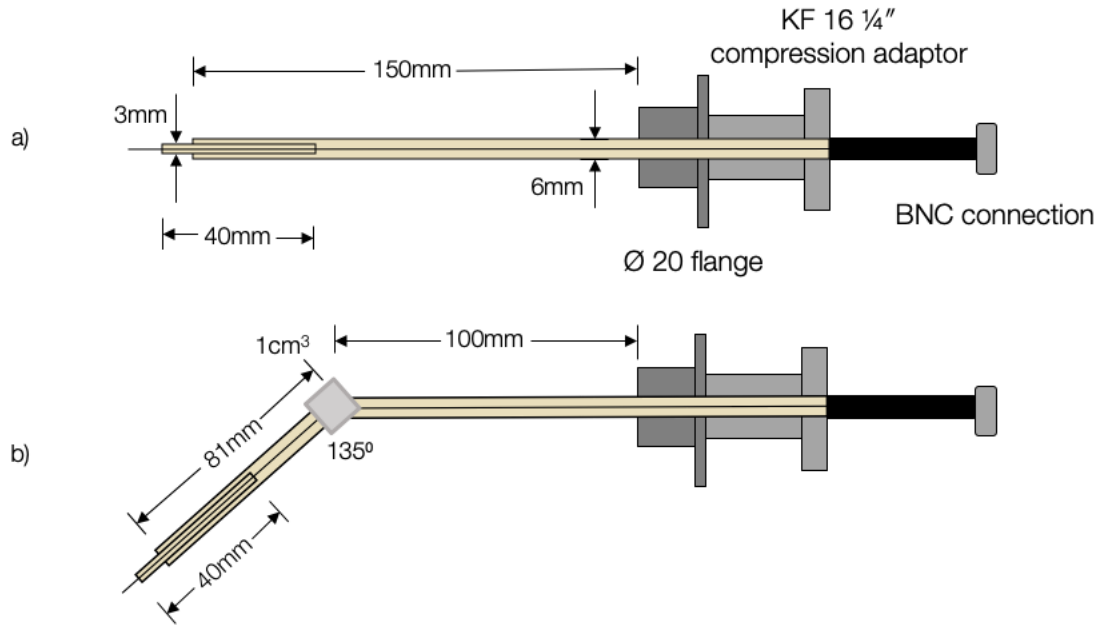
(a) The dimensions and shape of the “bulk” Langmuir probe. (b) The dimensions and shape of the “edge” Langmuir probe.
